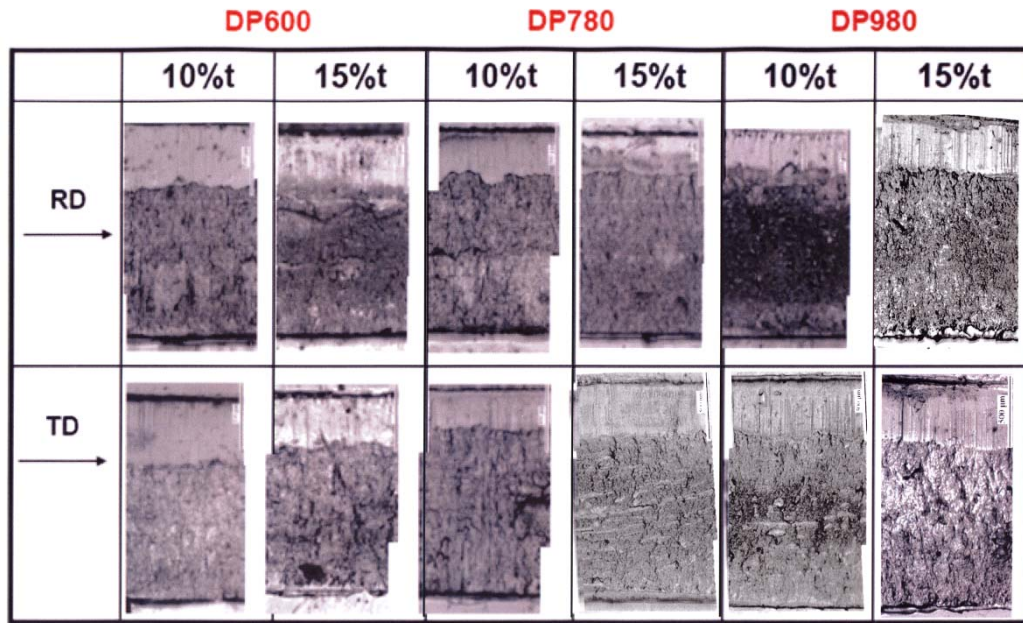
Burnish and fractured zones for different materials and blank orientations, and die clearances [110].
